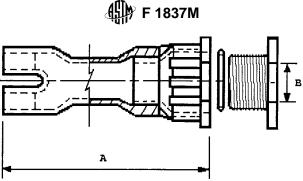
Type I-Multi-Legged Standard Cable Entry Seals
